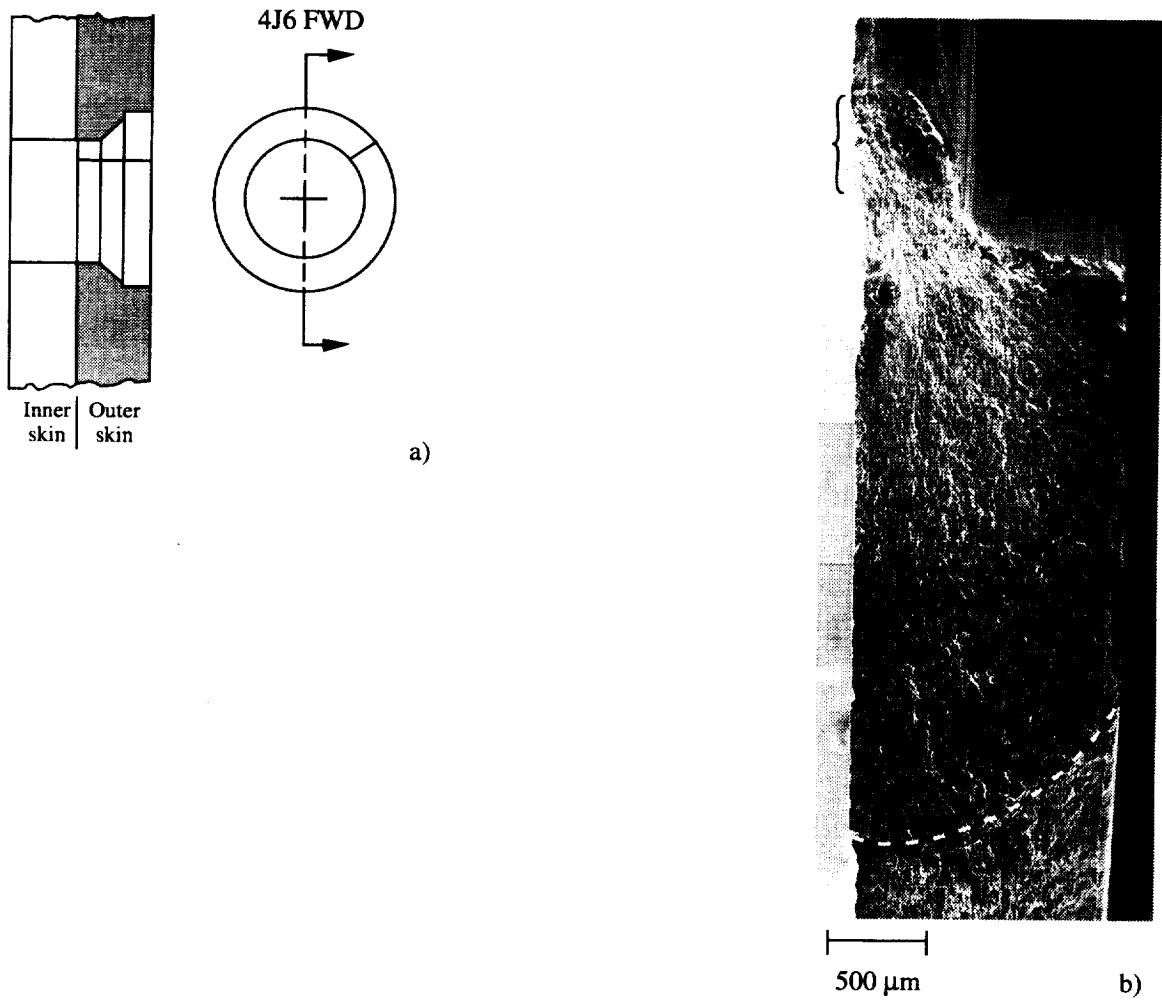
a) The schematic shows the rivet hole 4J6 configuration and the location of the outer skin fatigue crack oriented in the forward direction and about the 2 o'clock position. b) The SEM micrograph shows the fatigue crack fracture surface located at the outer skin rivet hole (top). The bracket marks the likely region of crack initiation and dashed line marks the fatigue crack front.
